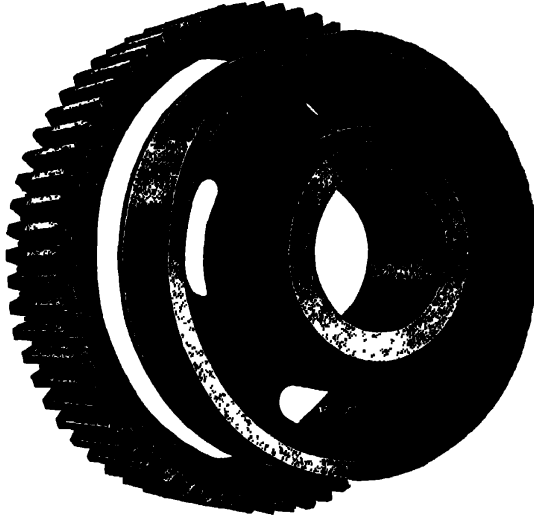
Composite Gear with Untreated Center of Cast-Steel
